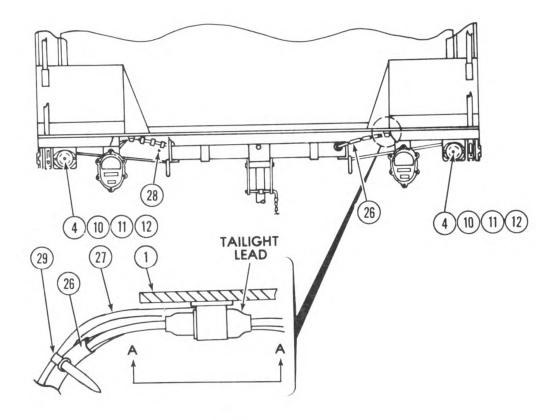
Trailer, Side, Top and Rear Views (Sheet 2 of 3)
